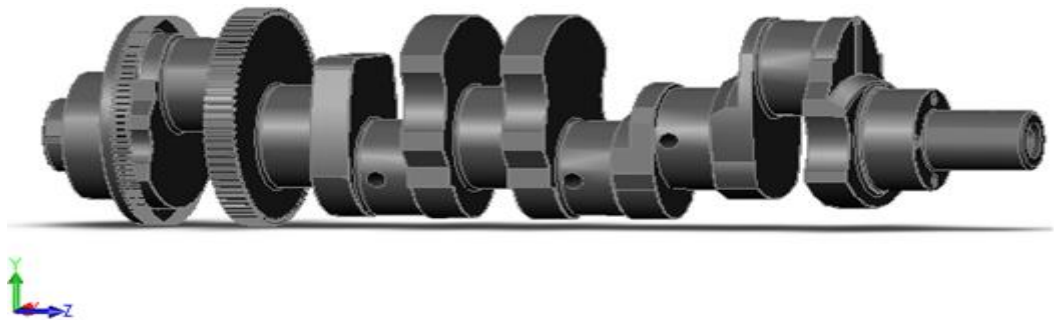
39 Three Dimensional Sketch of Crankshaft
